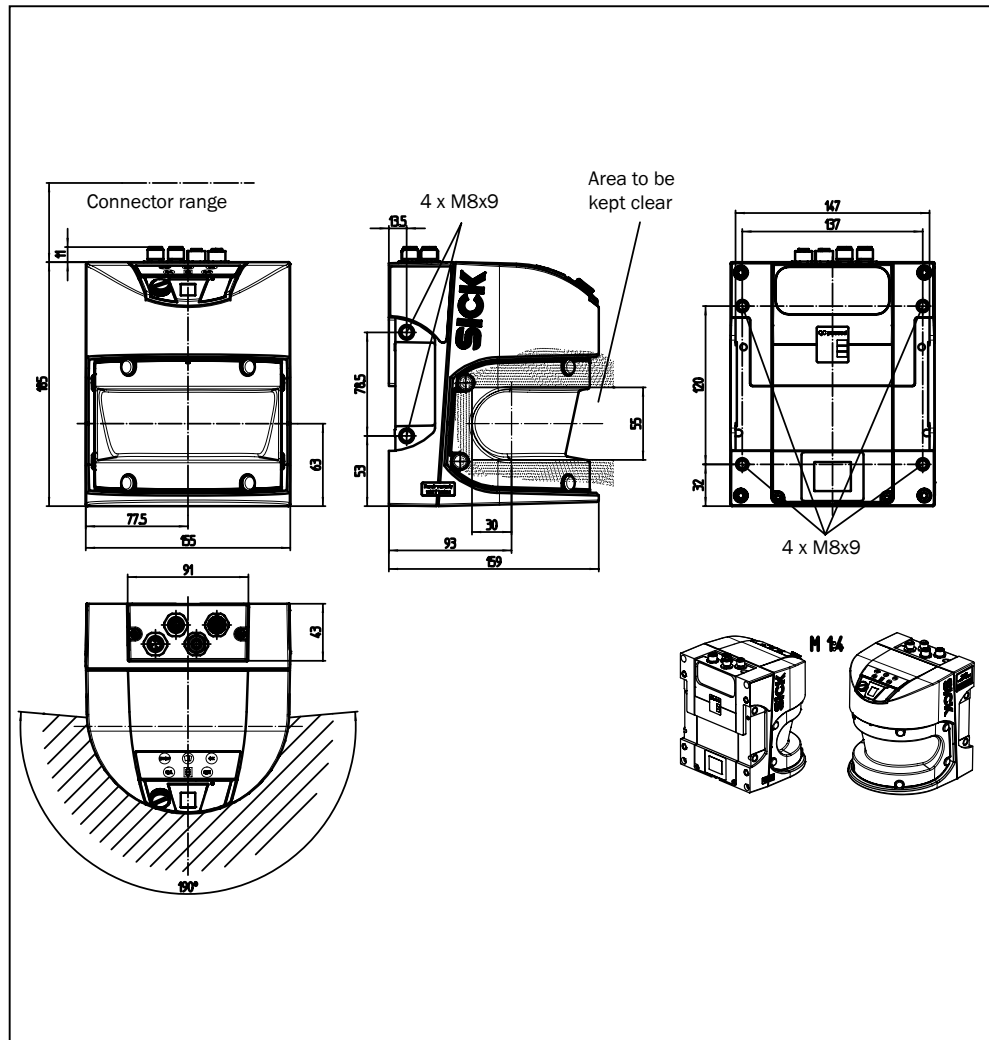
Dimensional drawing Bulkscan® LMS511 (mm)
